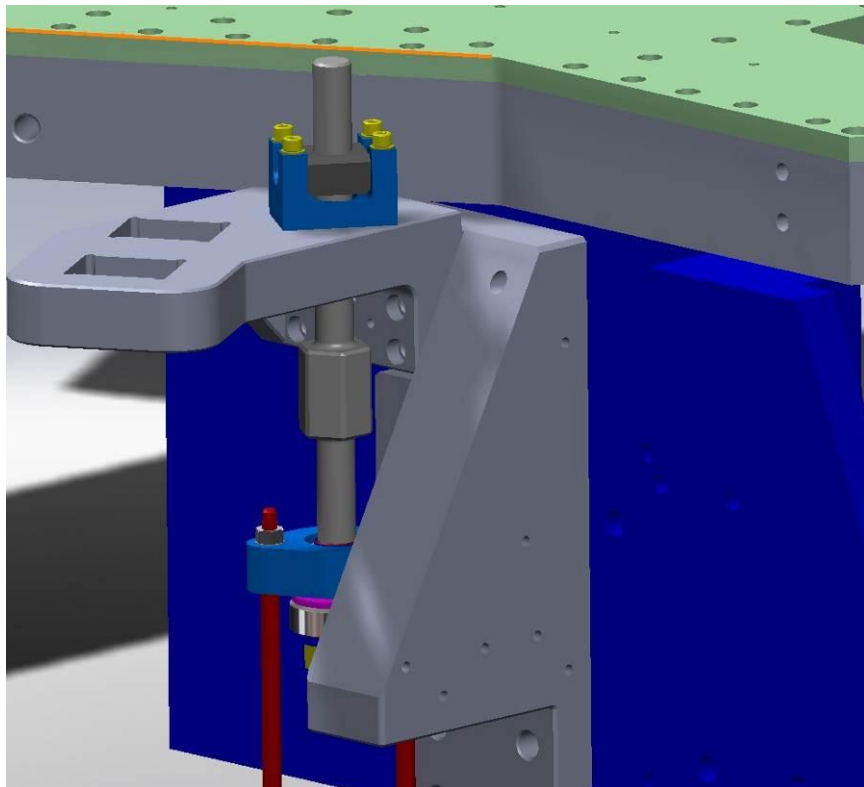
D0902454 Stage 1-2 Blade Puller Assembly mounted on D0902488 Pre-Load Bracket
